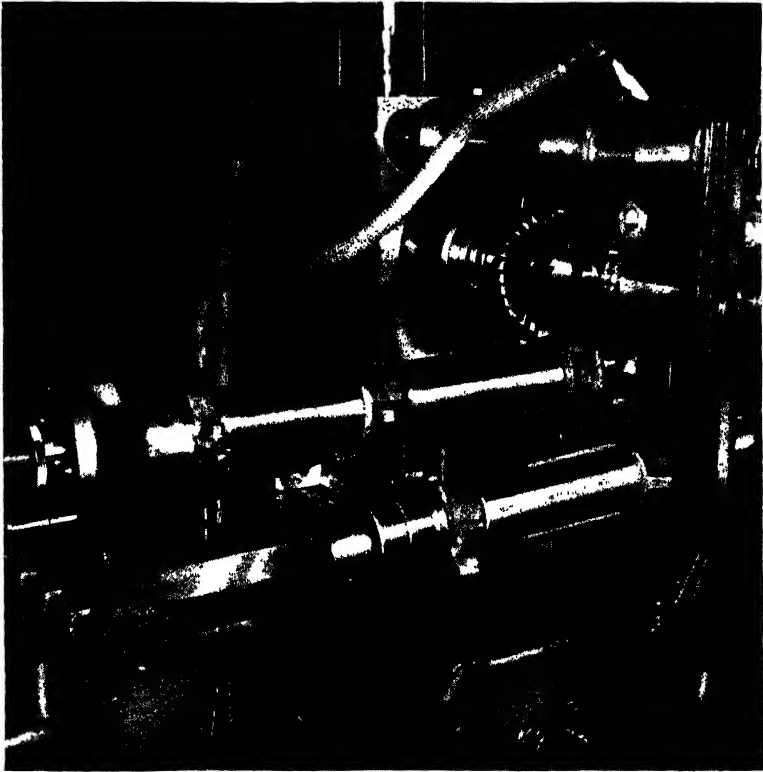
Milling Lugs on Airplane Landing Gear Strut
